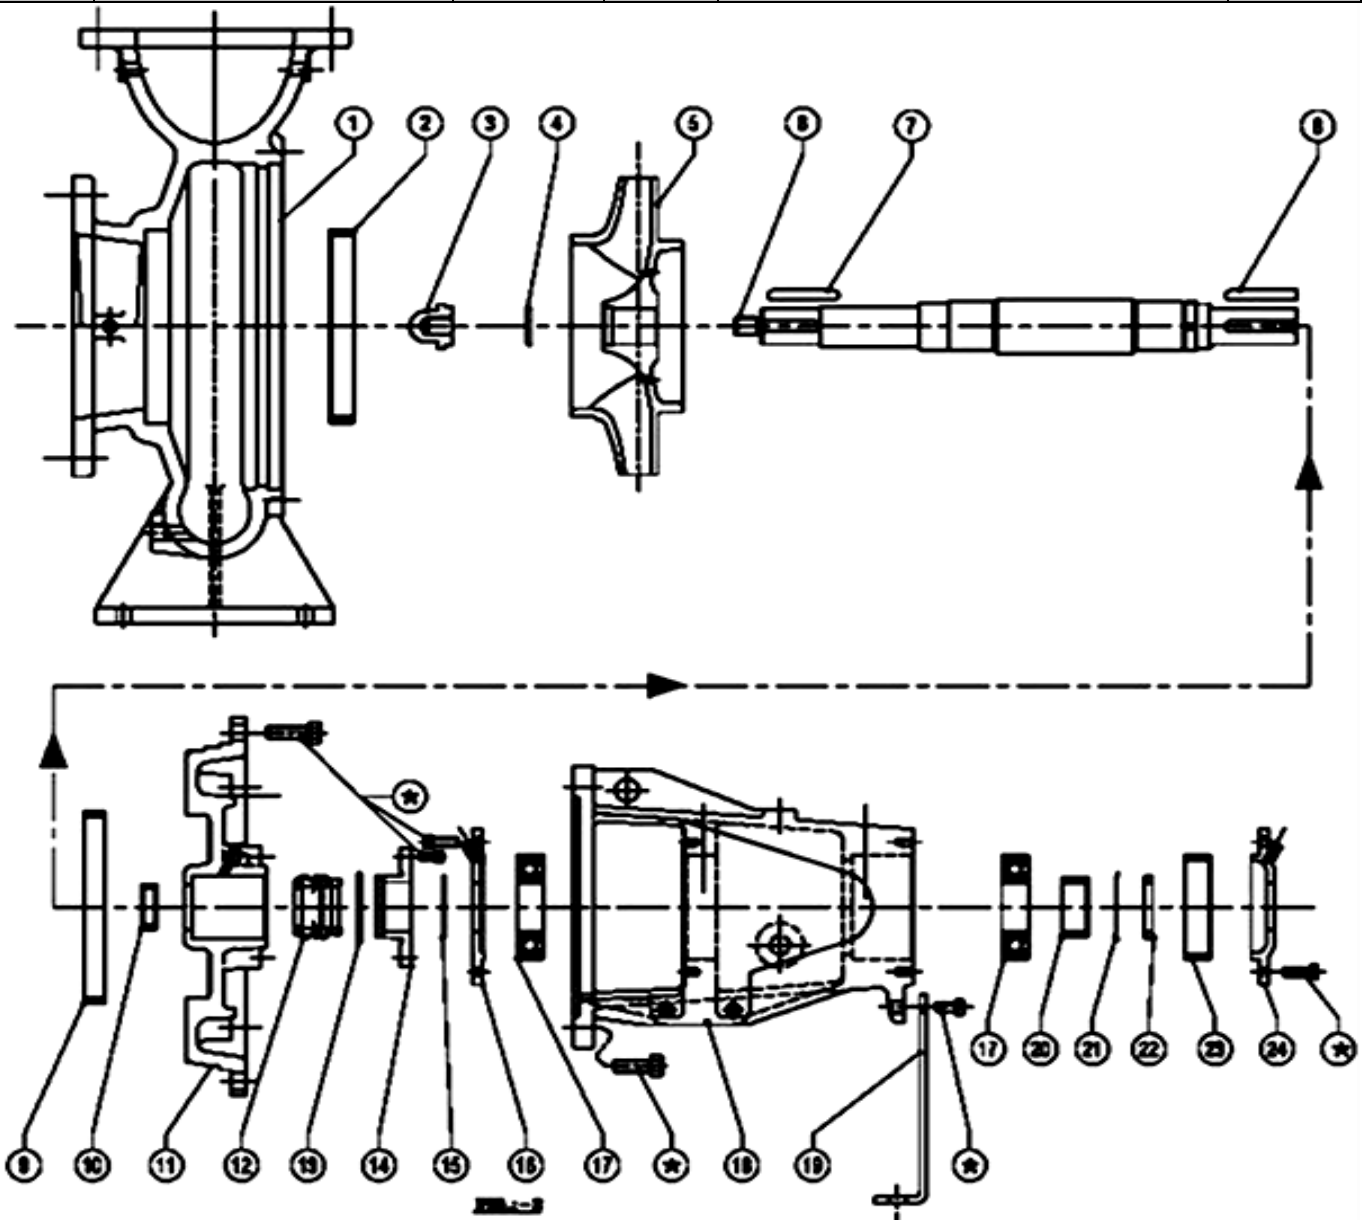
Exploded view – Mechanical Seal version (See Page no. 21 ; Point no.8)
